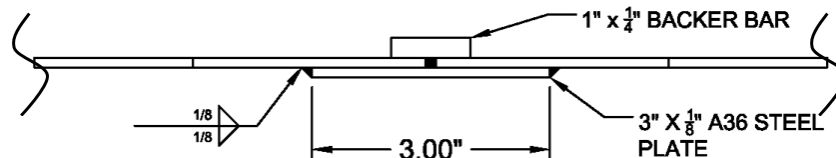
Repair #6 steel sleeve butt weld strengthening detail.
